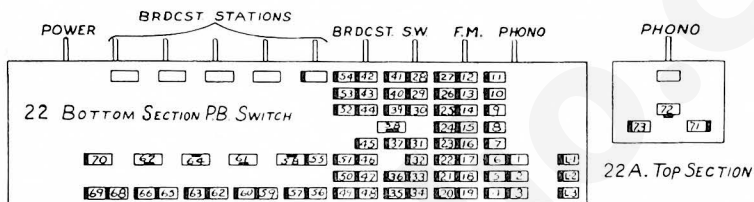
P. B. SWITCH, TOP AND BOTTOM SECTIONS
